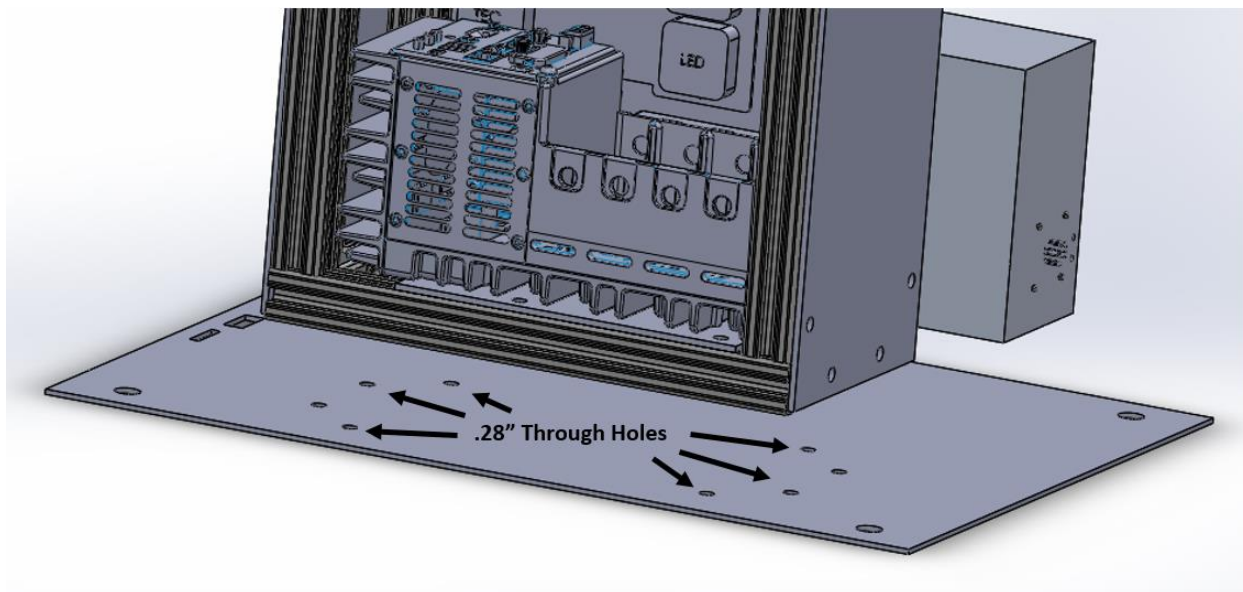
Payload attachment locations on HASP Mechanical Interface Plate
